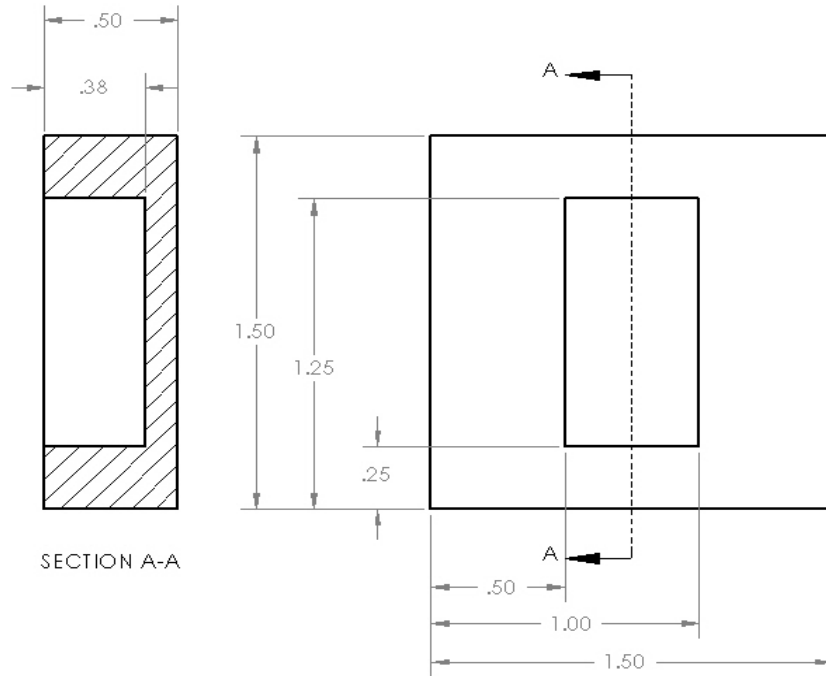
Example of a drawing that will be very costly despite its simple geometry. This is because the internal corners are difficult to machine.
